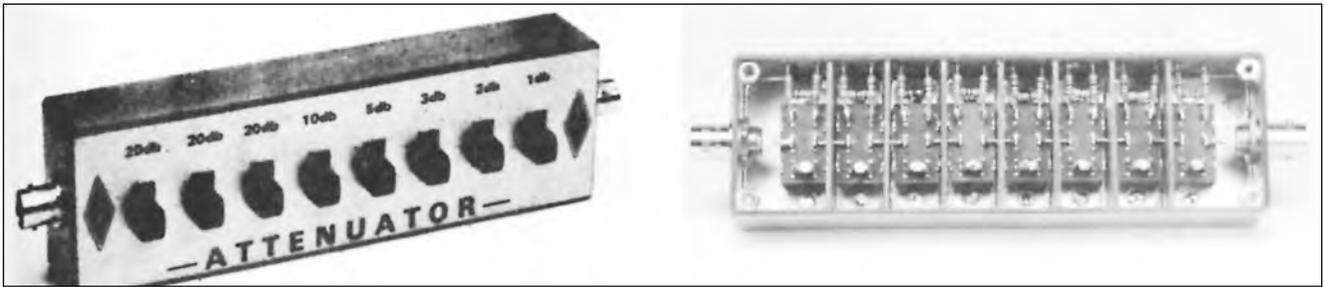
A construction method for a step attenuator. Double-sided circuit-board material, unetched (except for panel identification), is cut to the desired size and soldered in place. Flashing copper may also be used, although it is not as sturdy. Shielding partitions between sections are necessary to reduce signal leakage. Brass nuts soldered at each of the four corners allow machine screws to secure the bottom cover. The practical limit for total attenuation is 80 or 90 dB, as signal leakage around the outside of the attenuator will defeat attempts to obtain much greater amounts.
